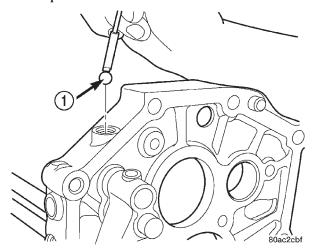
Remove Fifth Gear Check Ball 1 - FIFTH GEAR CHECK BALL
